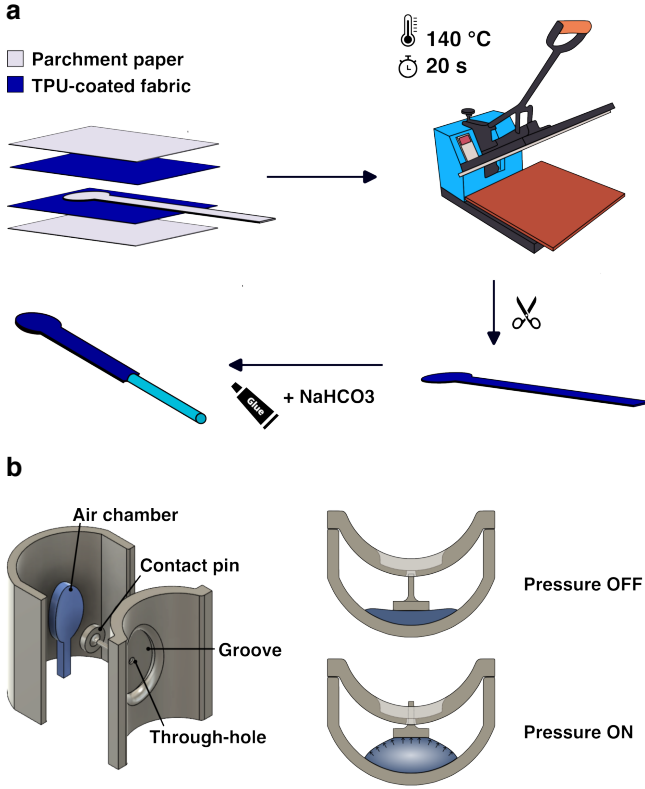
a) Schematic of the fabrication process of the air chamber. Layers in the heat-press were arranged as follows: parchment paper as an insulation layer, first TPU-coated fabric layer, a piece of parchment paper shaped like the chamber profile, second TPU-coated fabric layer, and a last layer of parchment paper. After the heat treatment, the desired profile was cut from the bonded layers. Finally, a plastic tube was inserted and glued into the elongated portion of the chamber. b) CAD of the custom support, printed in a photoresistive resin. Upon pressurization, the air chamber pushes the pin that slides through the support and comes into contact with the skin.
